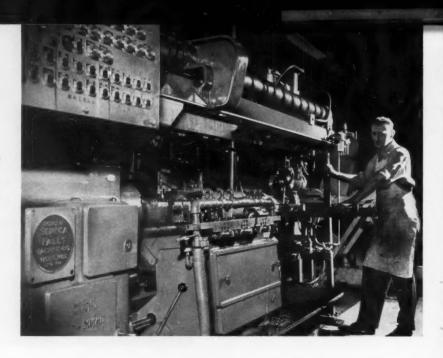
Main bearing surfaces of the crankshaft are undercut and faced on this lathe, which is automatically loaded and unloaded from transverse conveyors.
